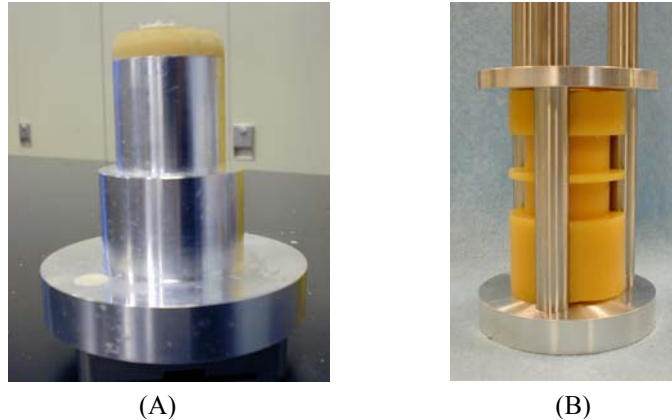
Improvements of fabrication. (A) Metal base for Soldermask. (B) Metal guide for mold assembly.
